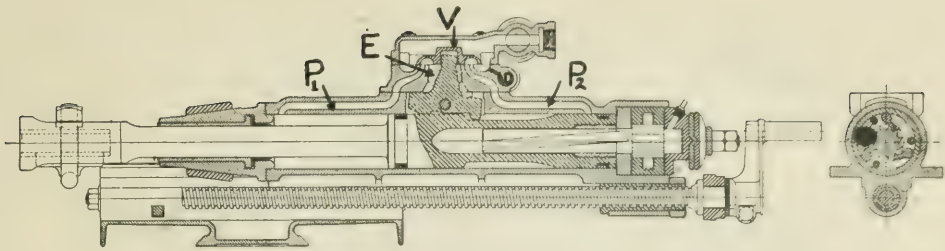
THE CHICAGO GIANT DRILL, SHOWING TAPPET VALVE.
